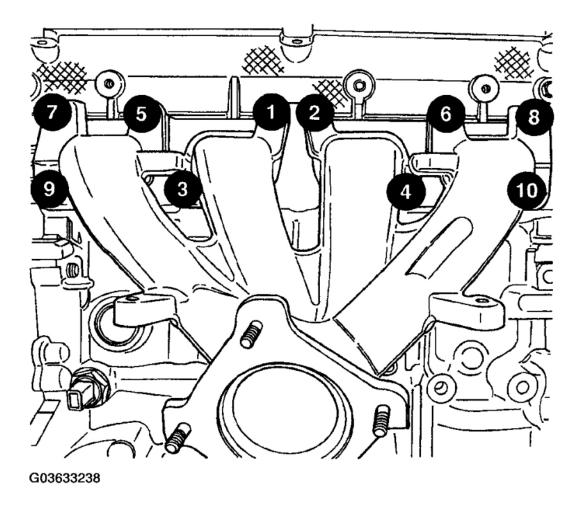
Identifying Exhaust Manifold Tightening Sequence Courtesy of DAIMLERCHRYSLER CORP.
